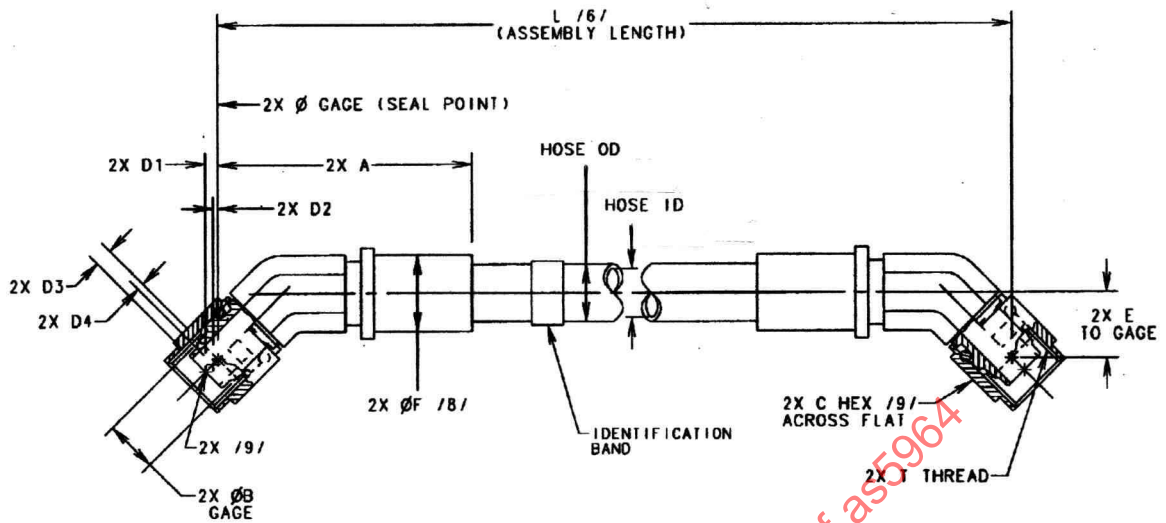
HOSE ASSEMBLY DIMENSIONS
